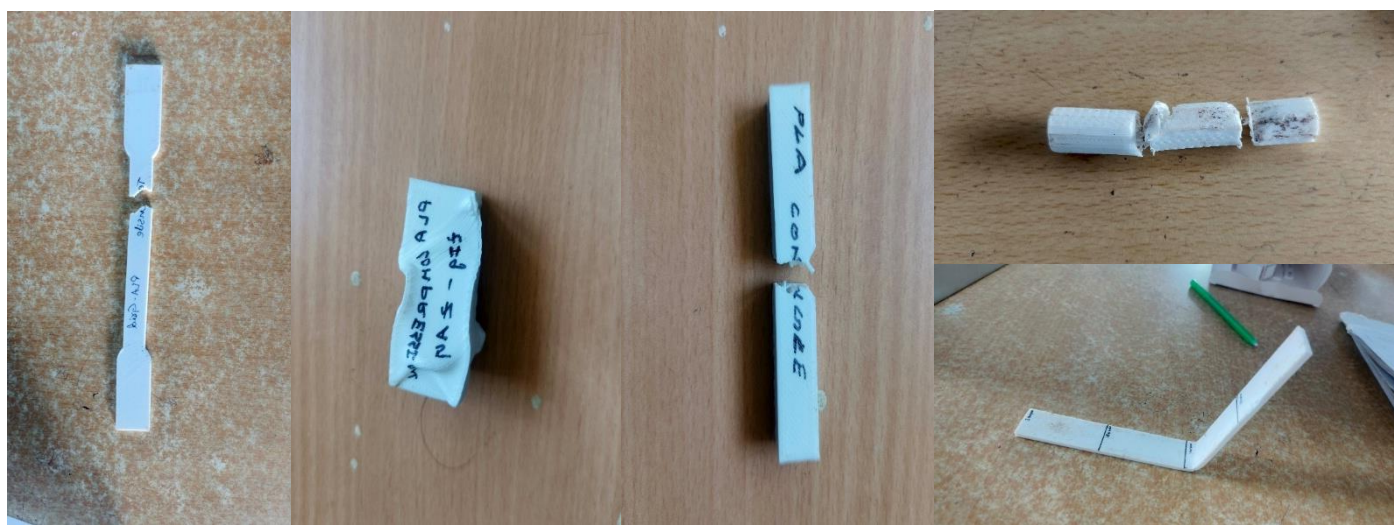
The deformed shapes of tensile, compression, impact, shear and flexural test specimens after testing
